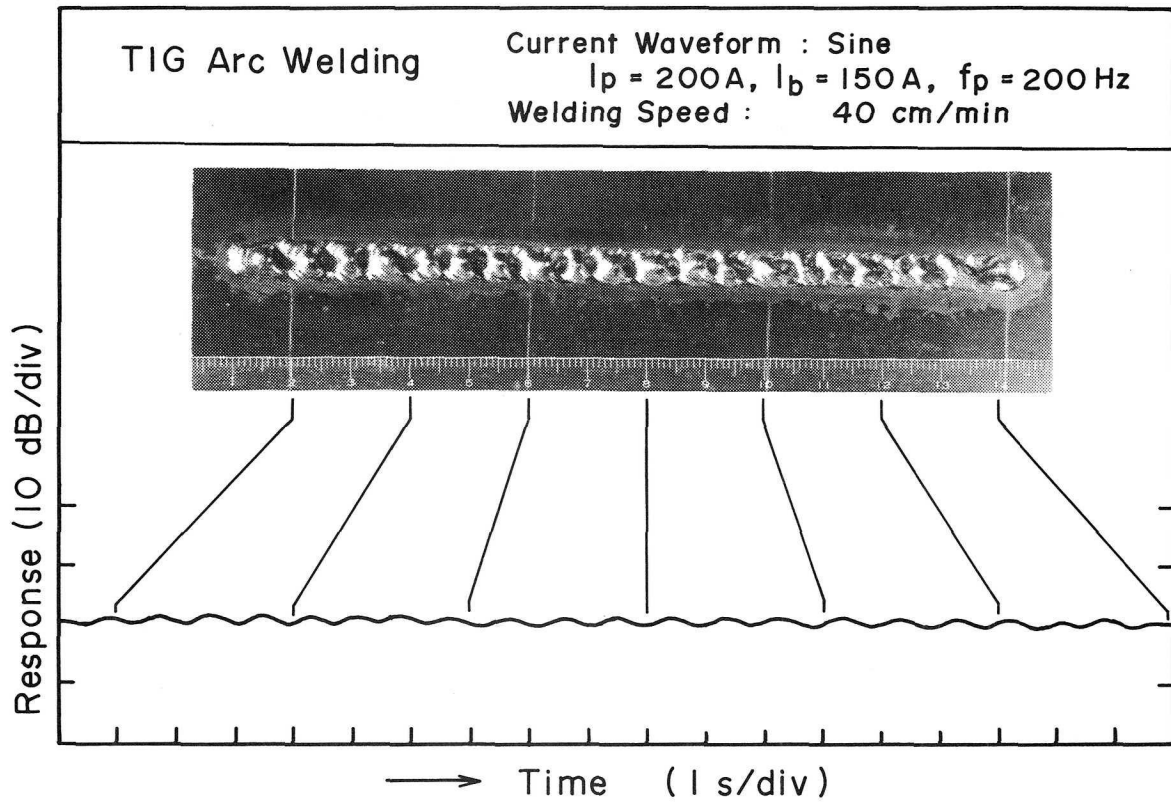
Example of humping bead formation detected by arc sound in TIG arc welding.
